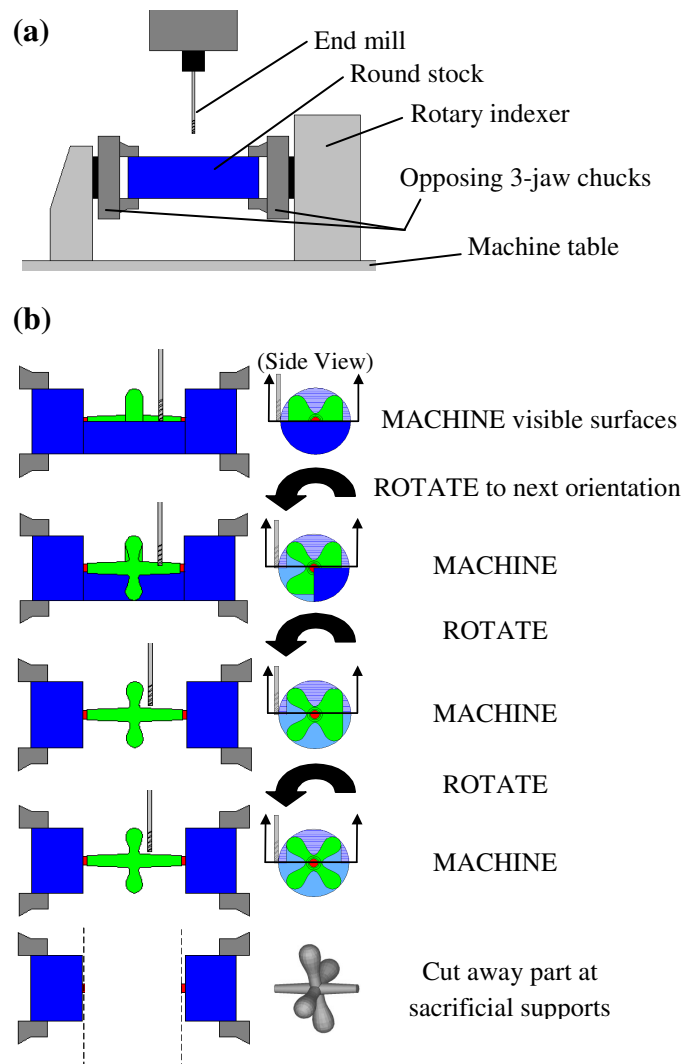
CNC-RP rapid machining (a) set up and (b) processing steps for machining a toy jack (Frank *et al.*, 2008)
